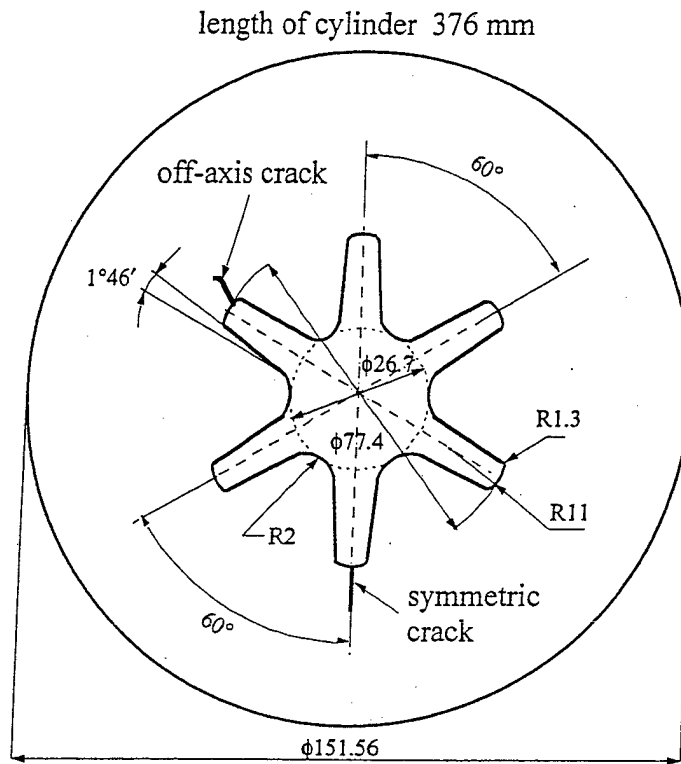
Dimensions and Crack Locations in a Cross-Section of the Model
